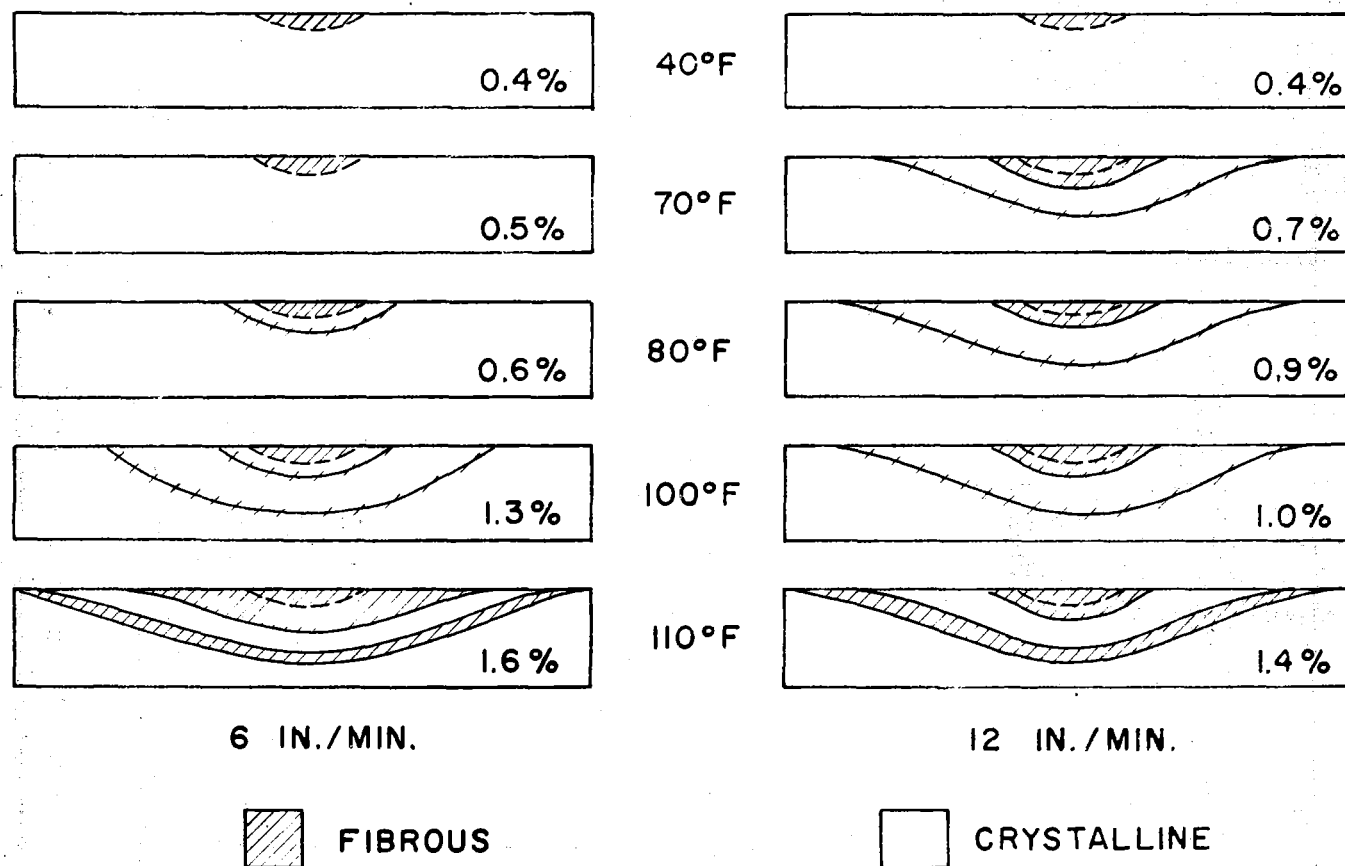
Fracture Behavior of 1/2 inch A-302 Steel Welded at 6 and 12 in./min.
